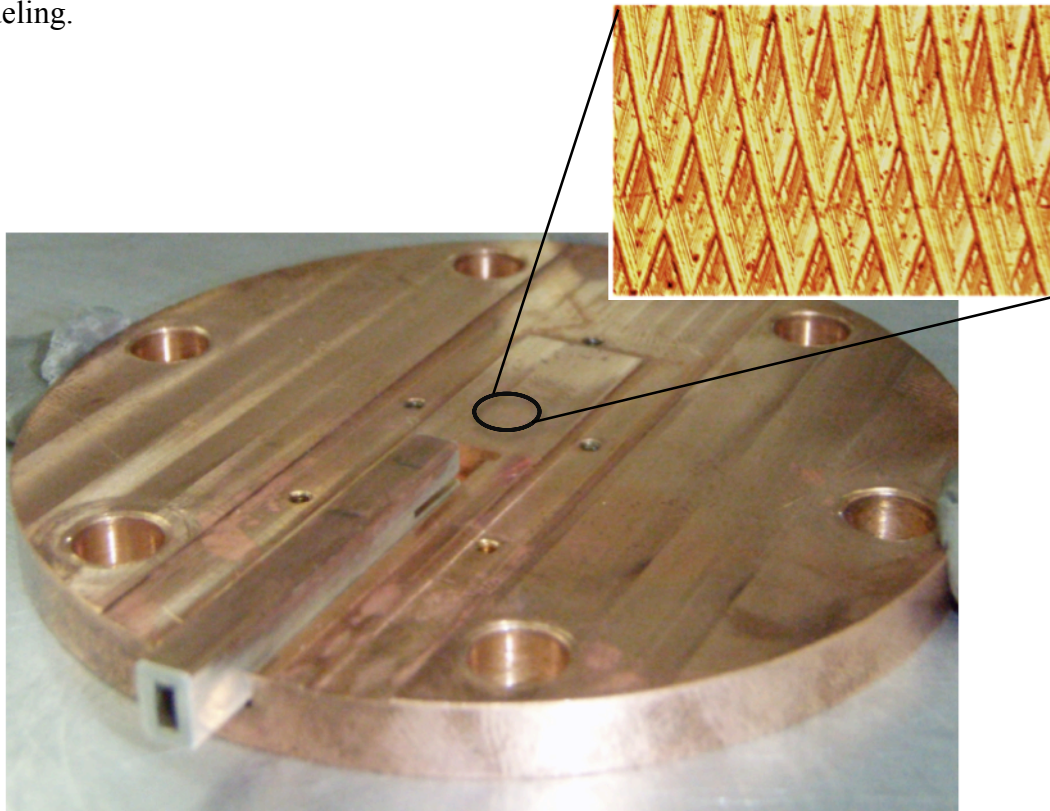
Optical microscope image of the chip mount showing machining tool marks.
